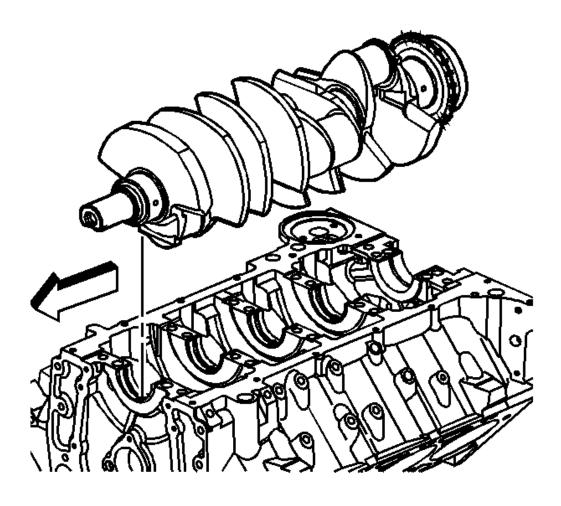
View Of Crankshaft Lower Bearing & Bearing Caps Courtesy of GENERAL MOTORS CORP.
